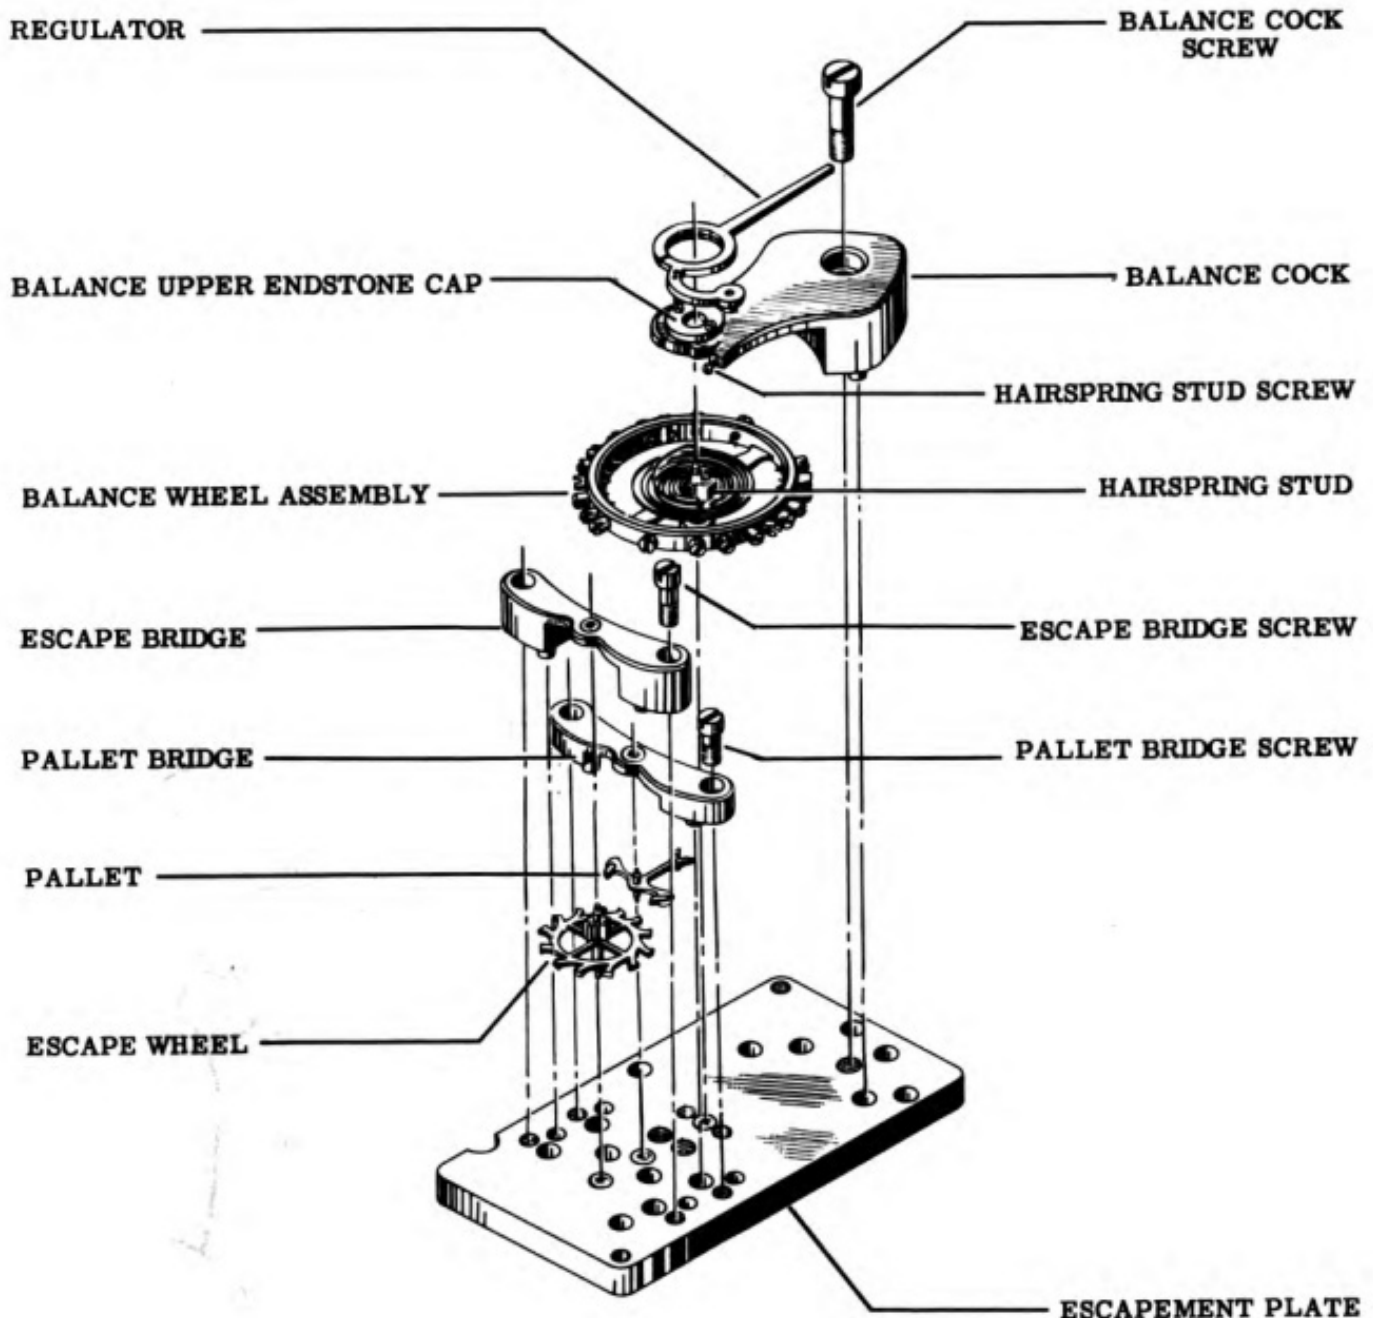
12E Mechanical Clock Escapement Assembly, No. 26
